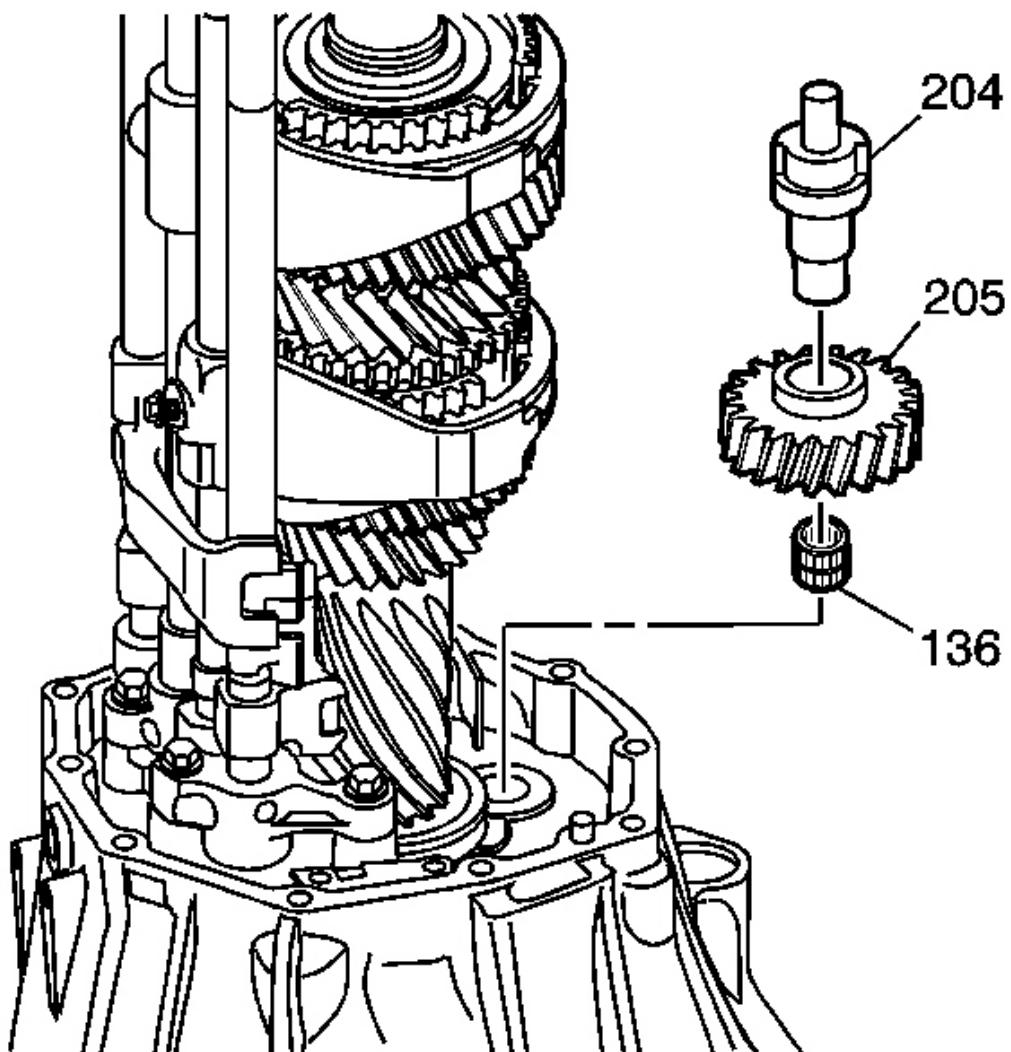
View Of Reverse Idler Gear, Bearing & Shaft
